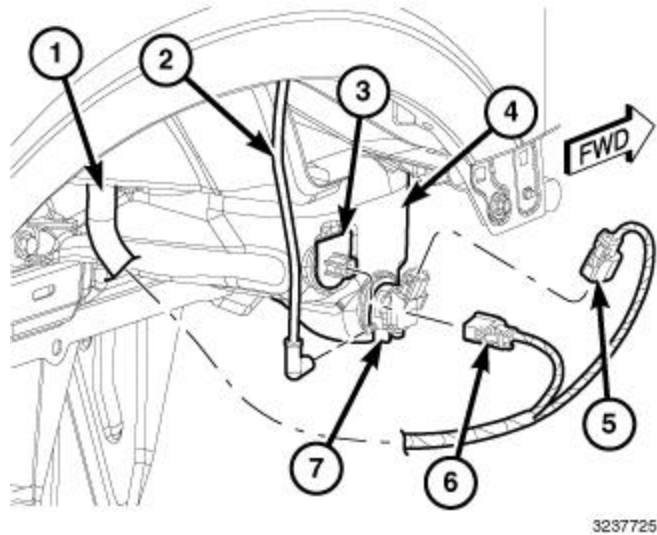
Washer Pump/Motor Unit, Washer Reservoir, Dash Wire Harness, Pump Motor & Washer Hose
